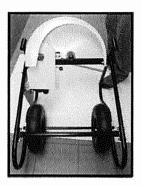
Remove mixer drum and place drum gear guard over mixing drum gear. This guard wraps over the drive assembly guard.
